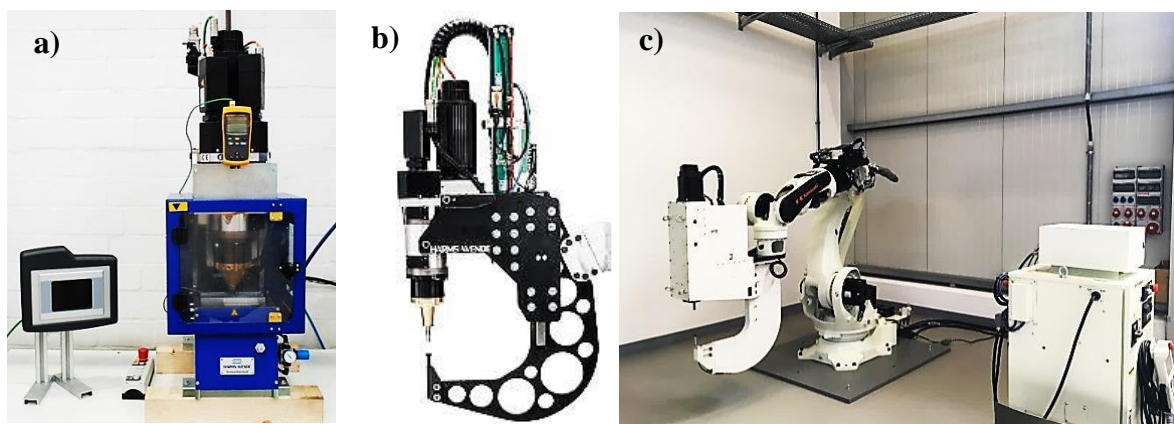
Welding machines with different levels of automation. a) RPS100 machine developed in a technology transfer project between HZG, Harms&Wende® and RIFTEC. b) RPS100 commercially available machine produced by Harms&Wende®. c) Industrial robot with Refill-FSSW head manufactured by Kawasaki Heavy Industries®.
